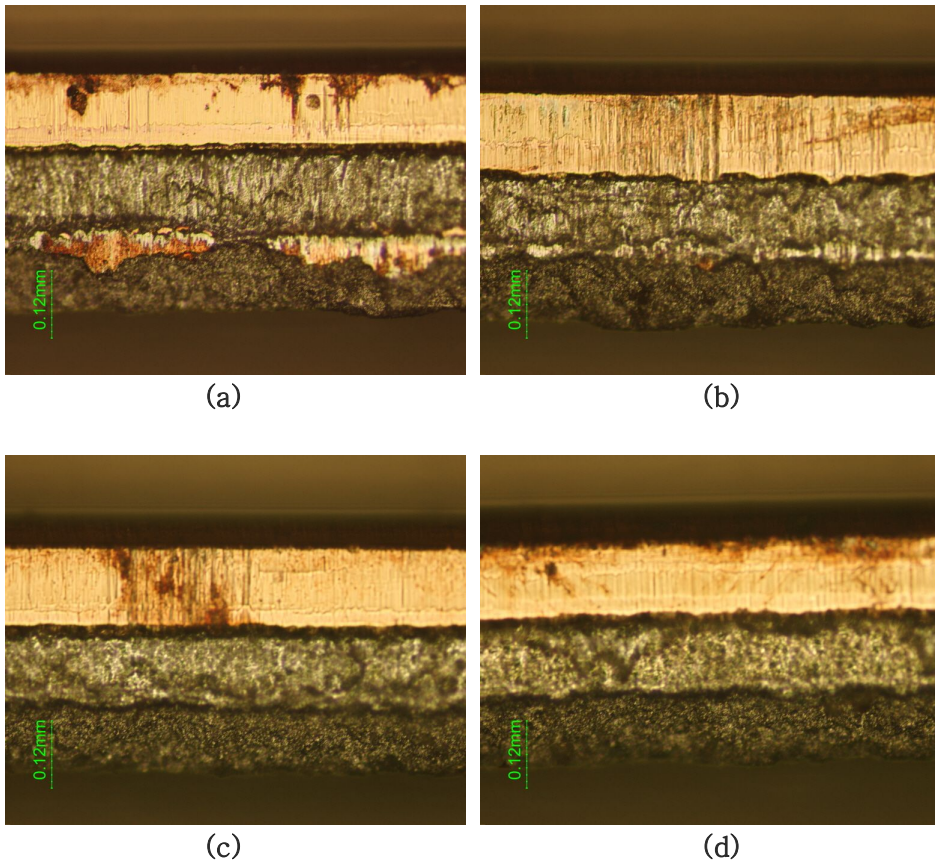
Comparison of shearing faces of Cu+GI vibration damping sheet metal with Cu at the top position: (a) clearance = 6.62%; (b) clearance = 8.97%; (c) clearance = 13.25%; (d) clearance = 17.52%
